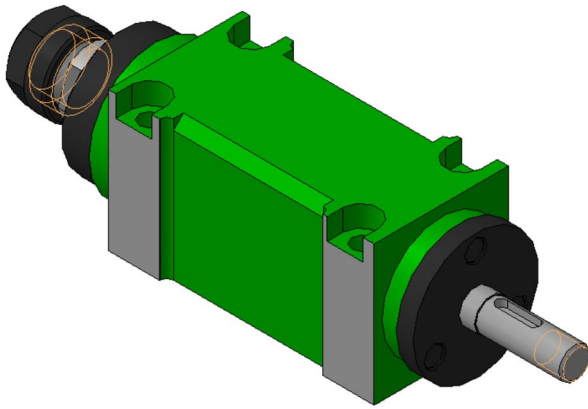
Upgraded spindle assembly using the SolidWorks software product
